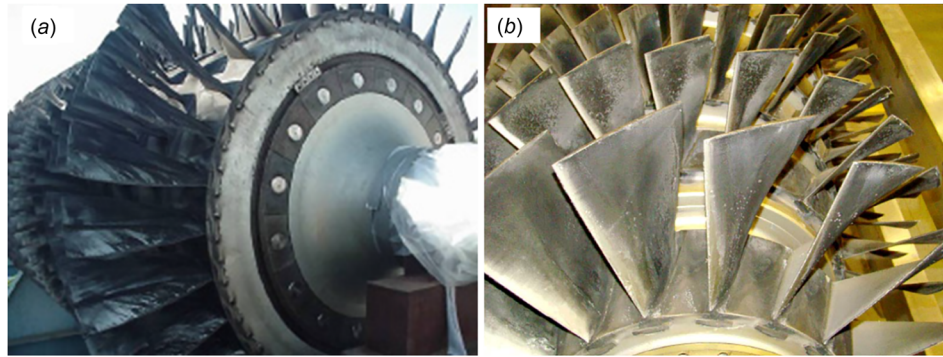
Blade contamination: (a) oily deposits on axial compressor blades as a result of oil leakage on a large heavy duty gas turbine [4] and (b) salt deposits on compressor blades after 18,000 h [3]
